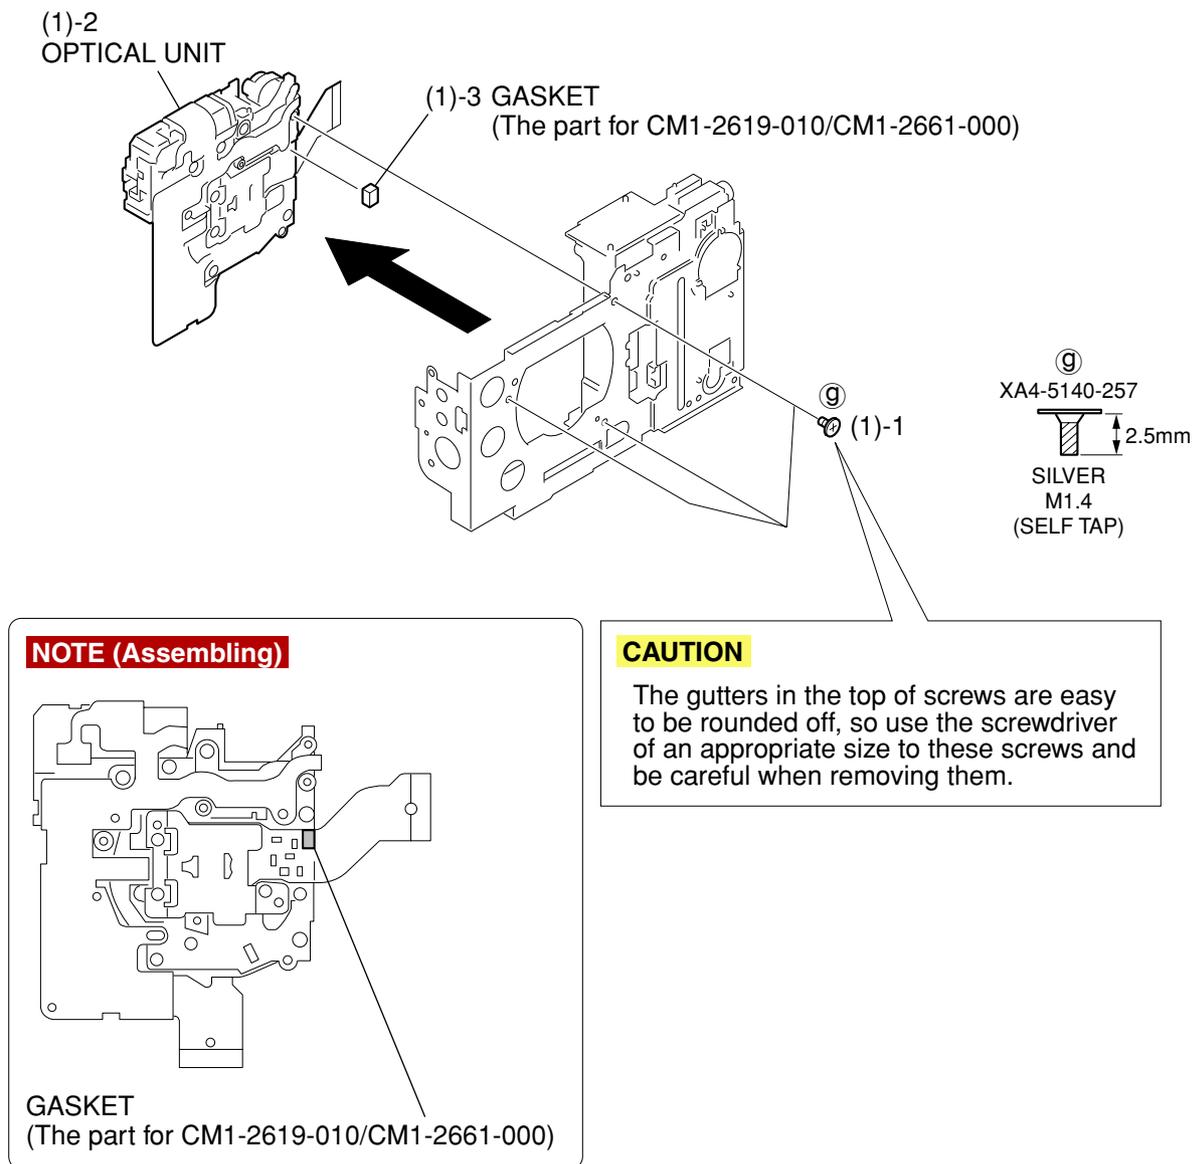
OPTICAL UNIT, GASKET (The part for CM1-2619-010/CM1-2661-000)
